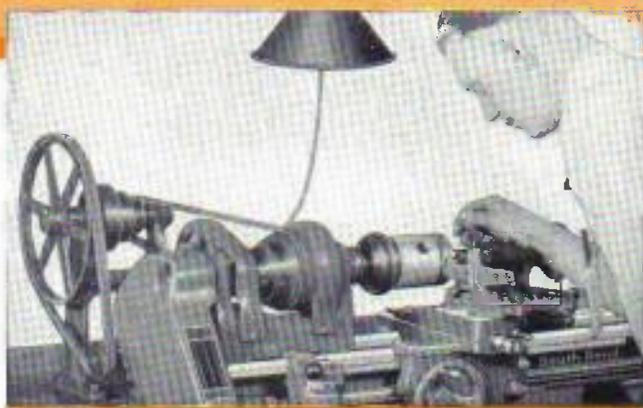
Finishing a Semi-Machined Piston in the 9-inch "Workshop" South Bend Precision Lathe.
